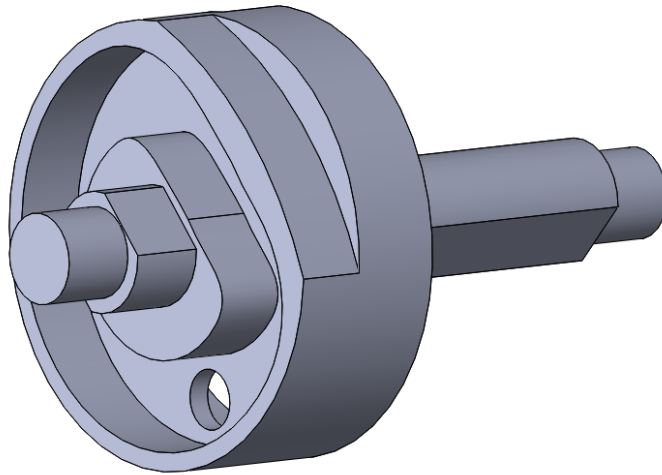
InnerCam's Camshaft (SolidWorks™ view)
